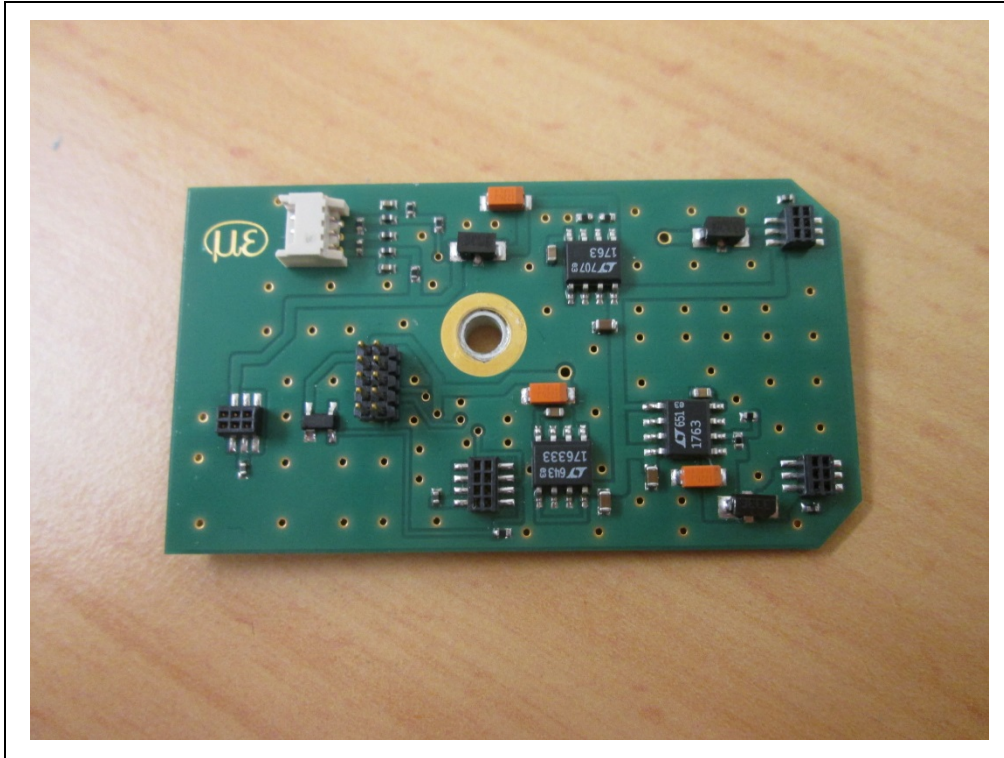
EUT#2 view of PCB 1 side 1 with connected sensor
